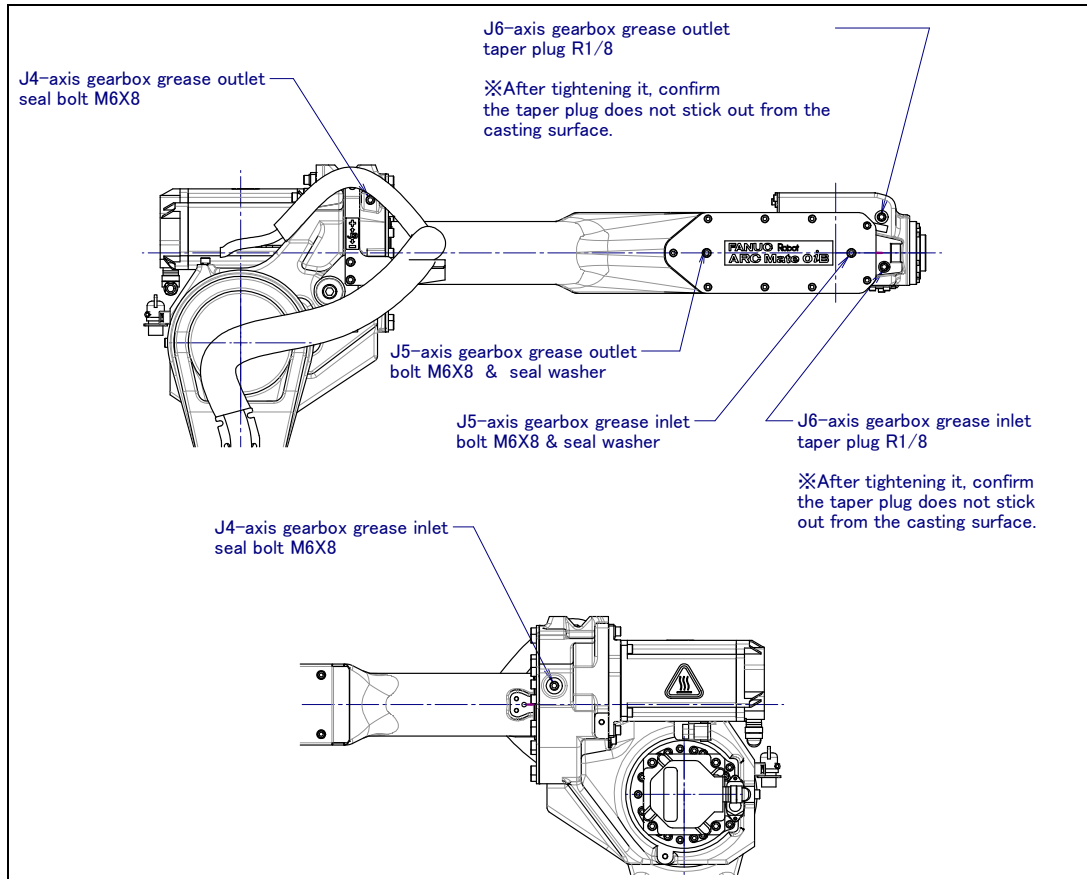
(b) Greasing points of gearboxes
